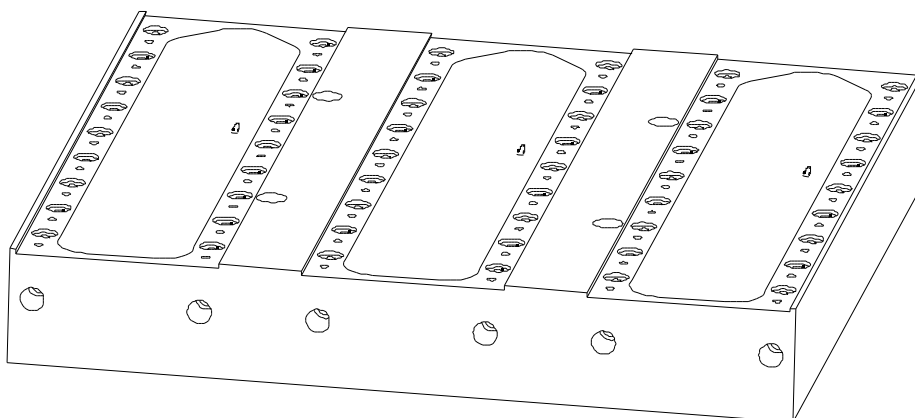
Teflon slide holder. The slide holder is mounted on the X axis positioner.
